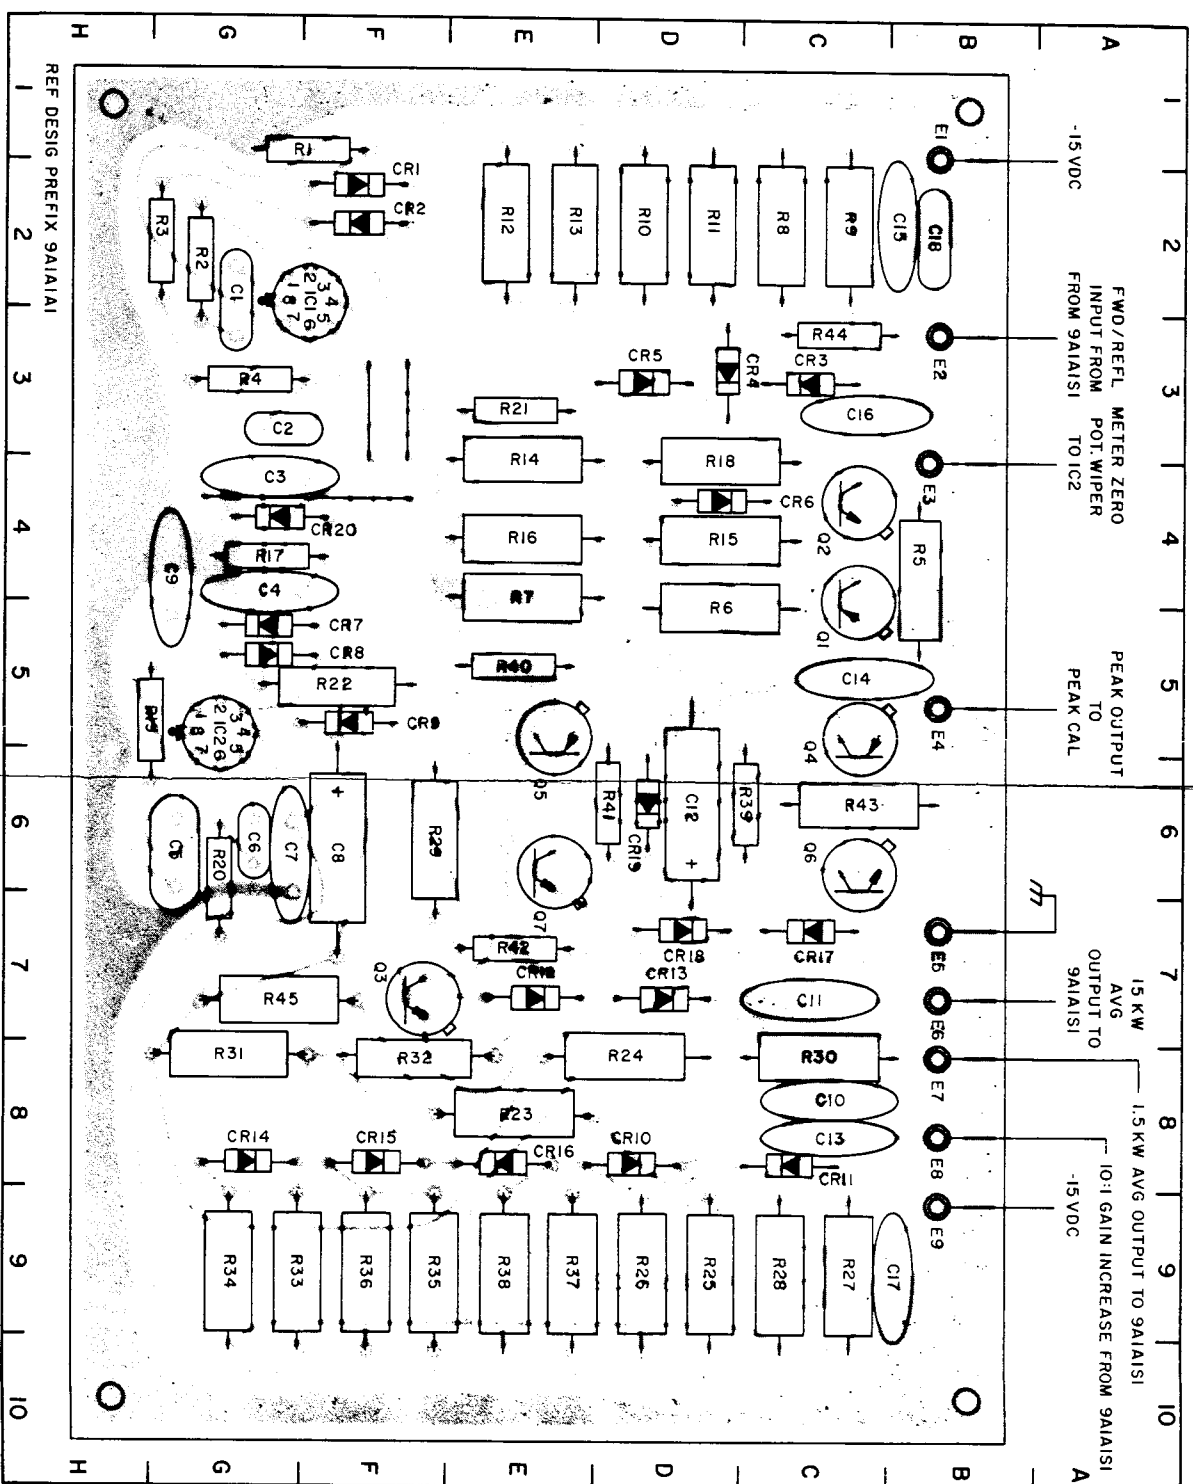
10 KW PA, Peak/Average Detector PCB Assembly, 9A1A1A1, Component Locations from Foil Side
